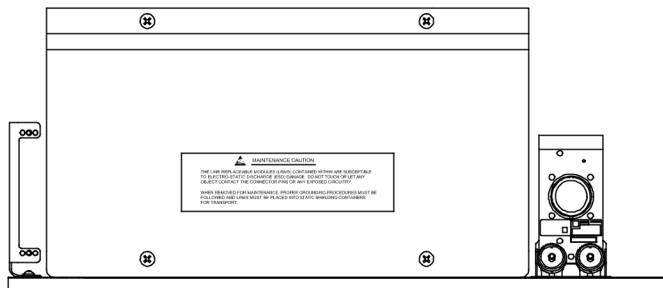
Removal of the 130-340683-0399 Placard and Installation of the 130-340683-0403 Placard (Sheet 1)
